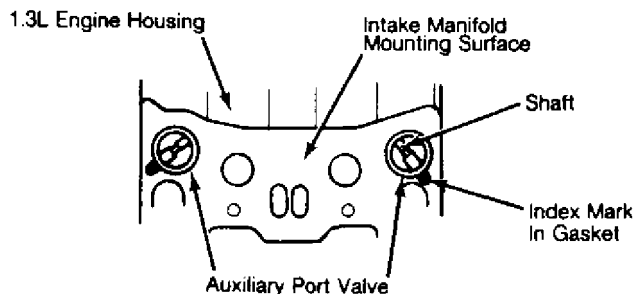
Installing Auxiliary Port Valves on 1.3L Engine
